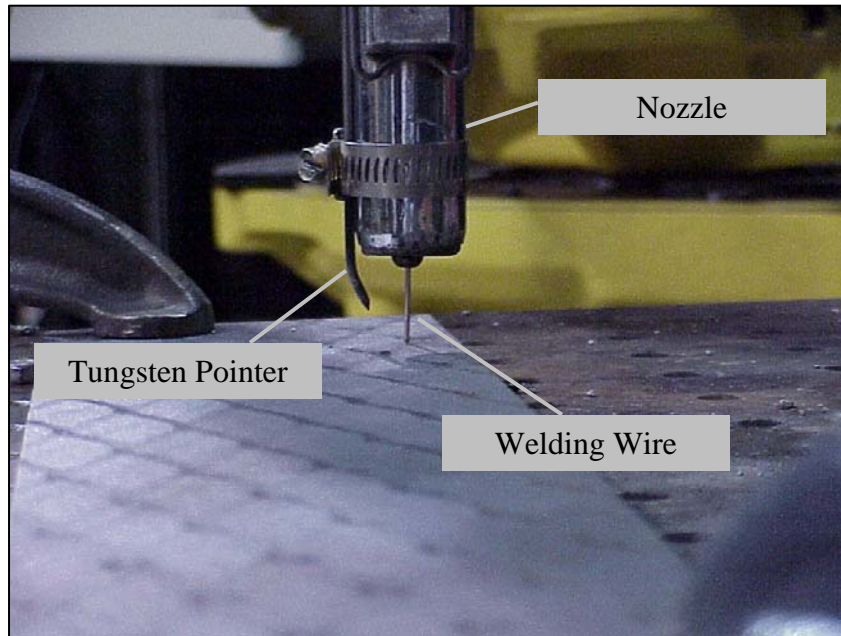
Experimental setup for preliminary welding illustrating the use of a tungsten pointer to mark arc length.
